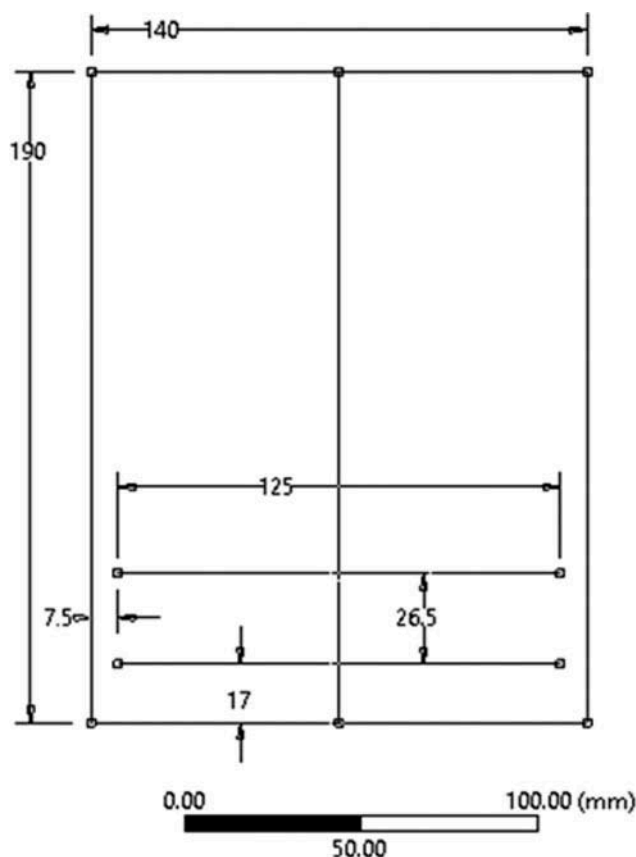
Geometry layout of the grinding chamber for the lab-scale mill.
